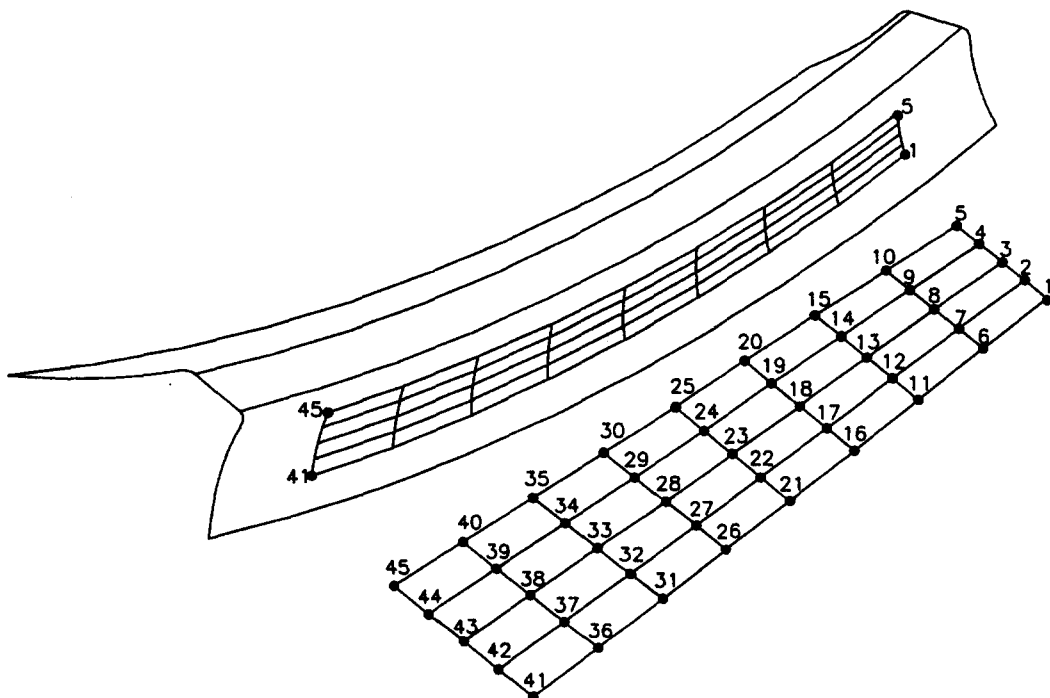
Sampling surface points on the spiral bevel gear convex side.
